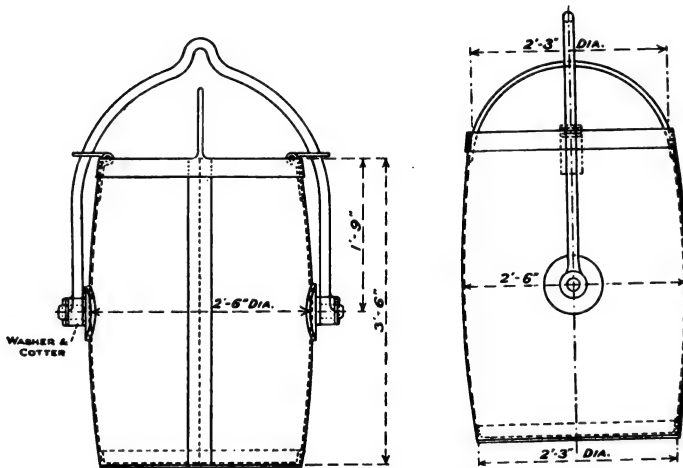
Water-Barrel commonly used in Sinking Pits.
